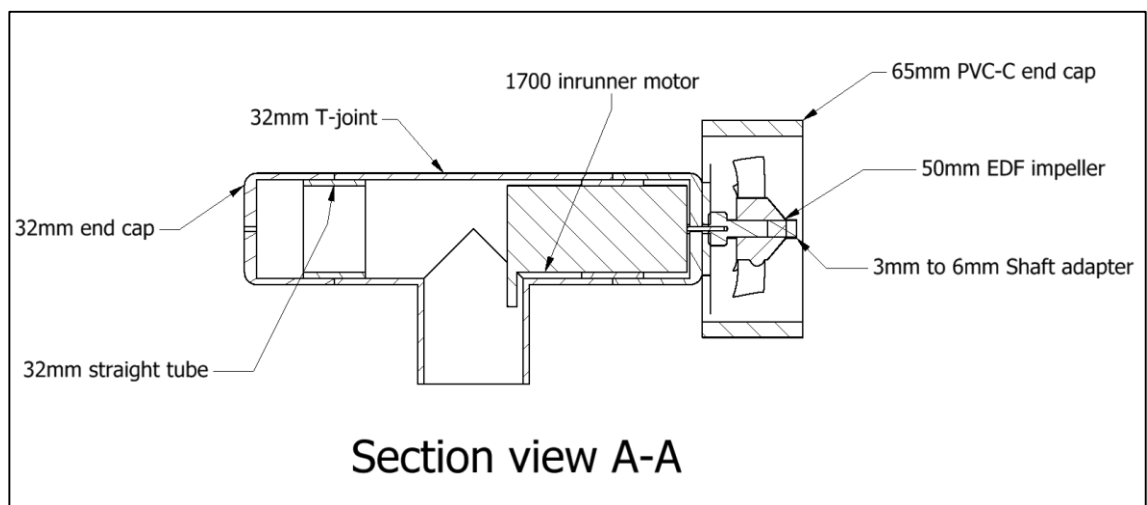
Sectional view of the motor assembly (Source: Robe, 2014)
